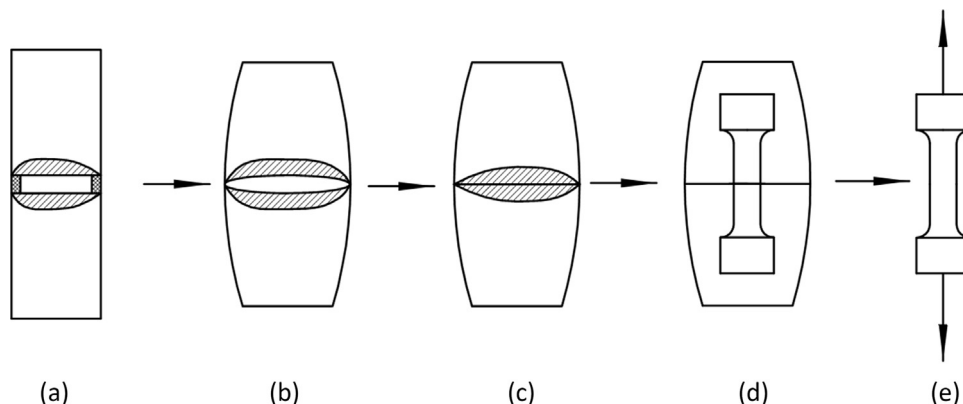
Schematic illustrating the process of crack presetting, crack healing and tensile sample manufacturing: (a) drilling holes and sealing, (b) compressing, (c) healing and quenching, (d) machining tensile samples, (e) tensile testing.
